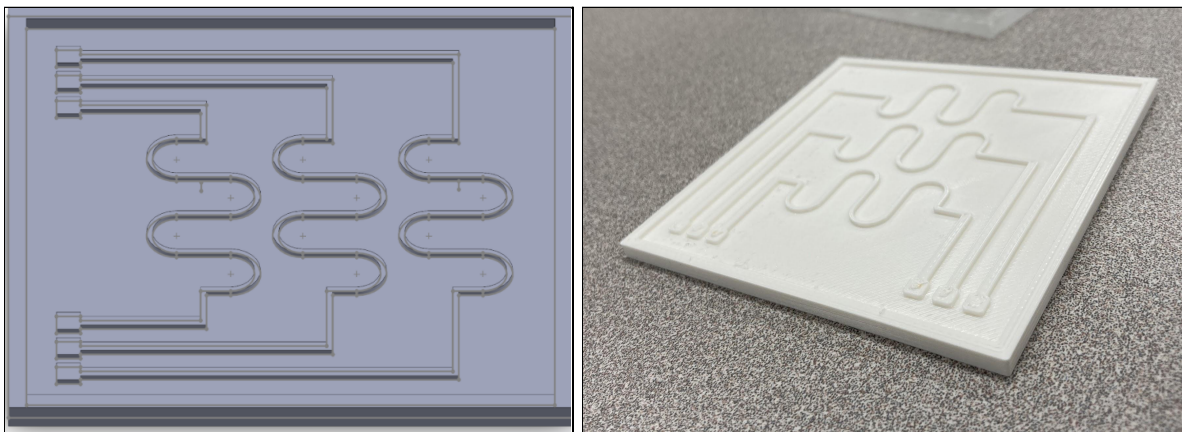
SolidWorks model of initial mold (left) and the 3D printed mold itself (right).
